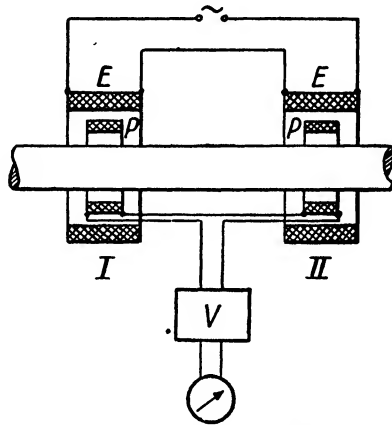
PRINCIPLE OF TUBE AND BAR TESTING MACHINE:
